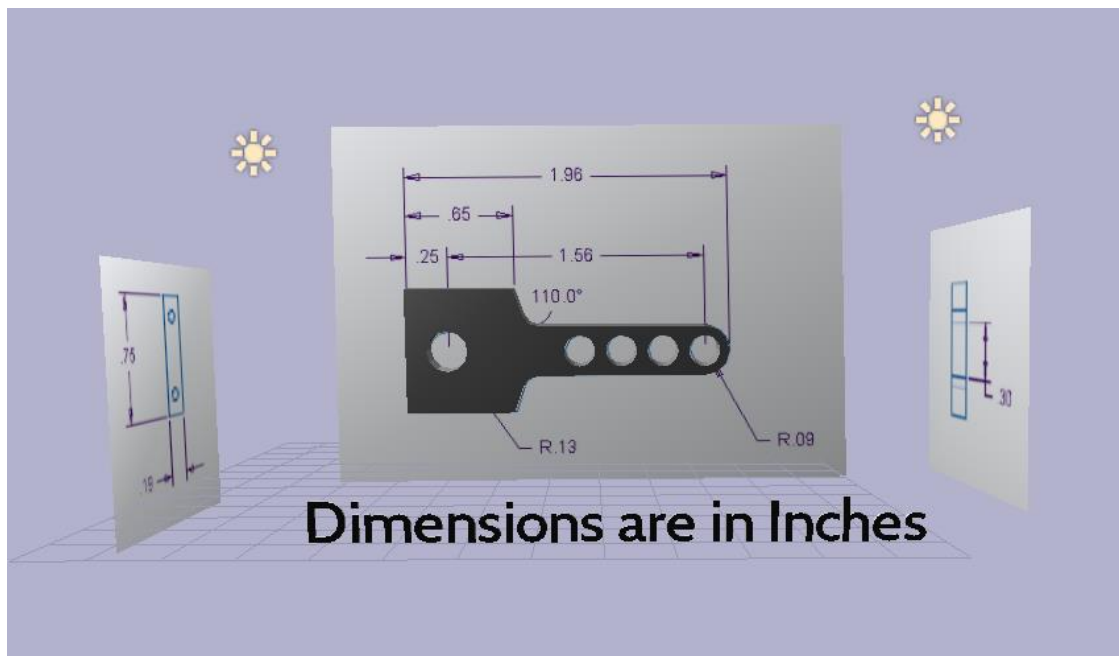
Original Connecting Rod Accompanied by Engineering Drawings with Dimensions
